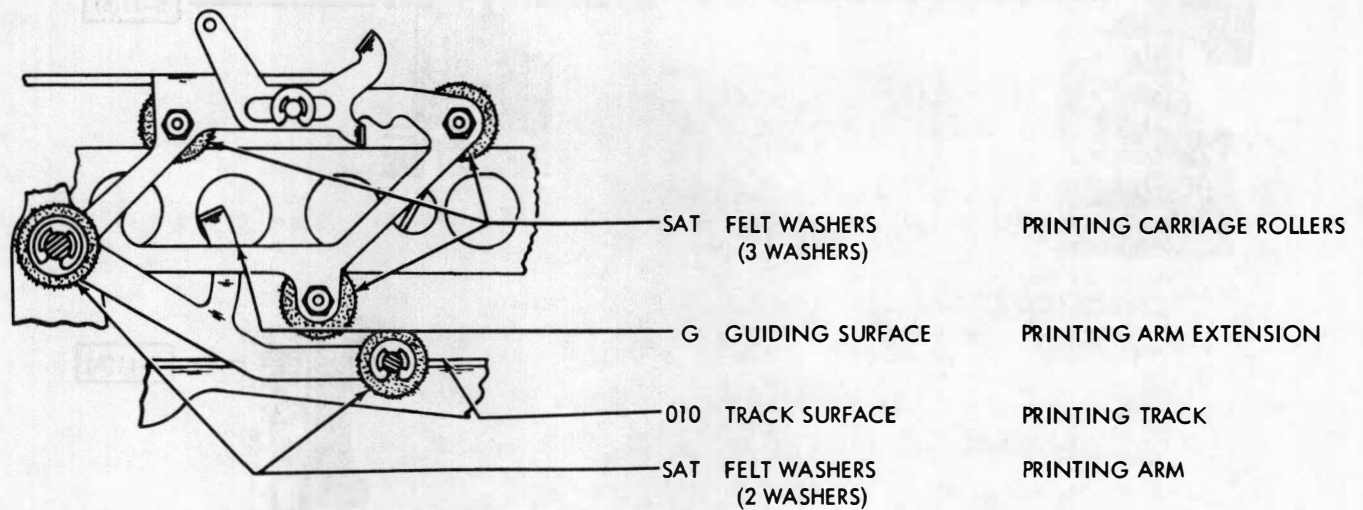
Automatic Typewriter Lubrication — Printing Mechanism
